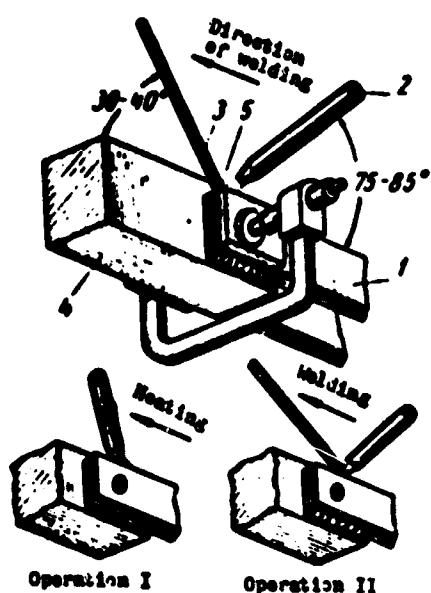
Welding of copper busbars to steel rod: 1) copper bus or pack of bands, 2) carbon electrode, 3) filler rod, 4) steel rod, 5) graphite forming plate.
